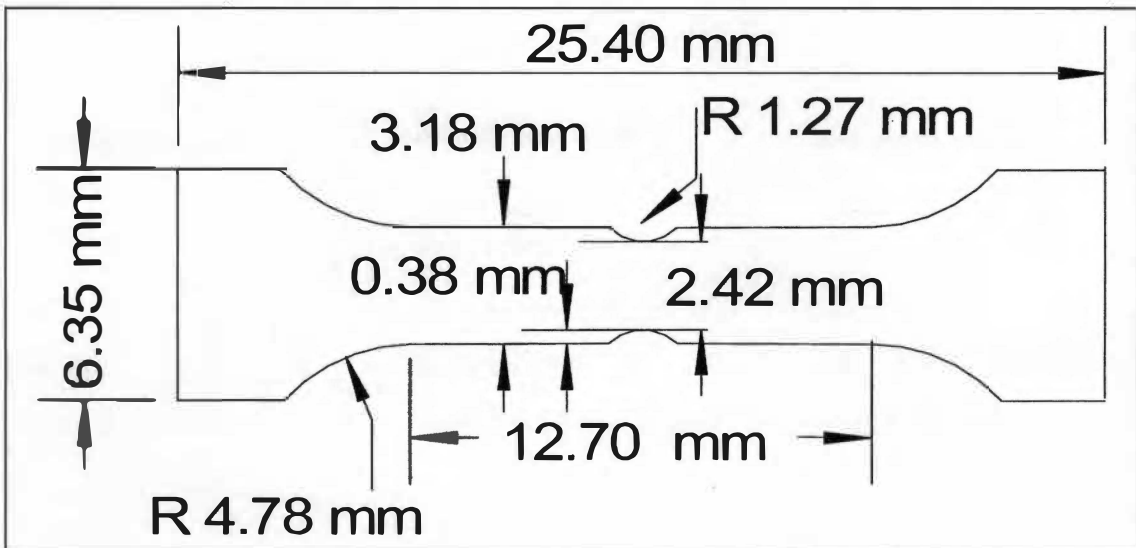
The Initial BMG-11 Specimen Geometry for Fatigue Testing in Air and Vacuum.
